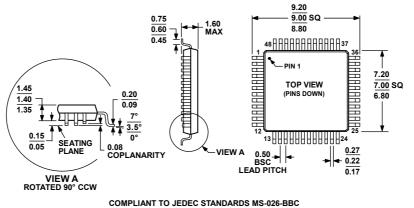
48-Lead Low-Profile Quad Flat Package [LQFP] (ST-48) Dimensions shown in millimeters
